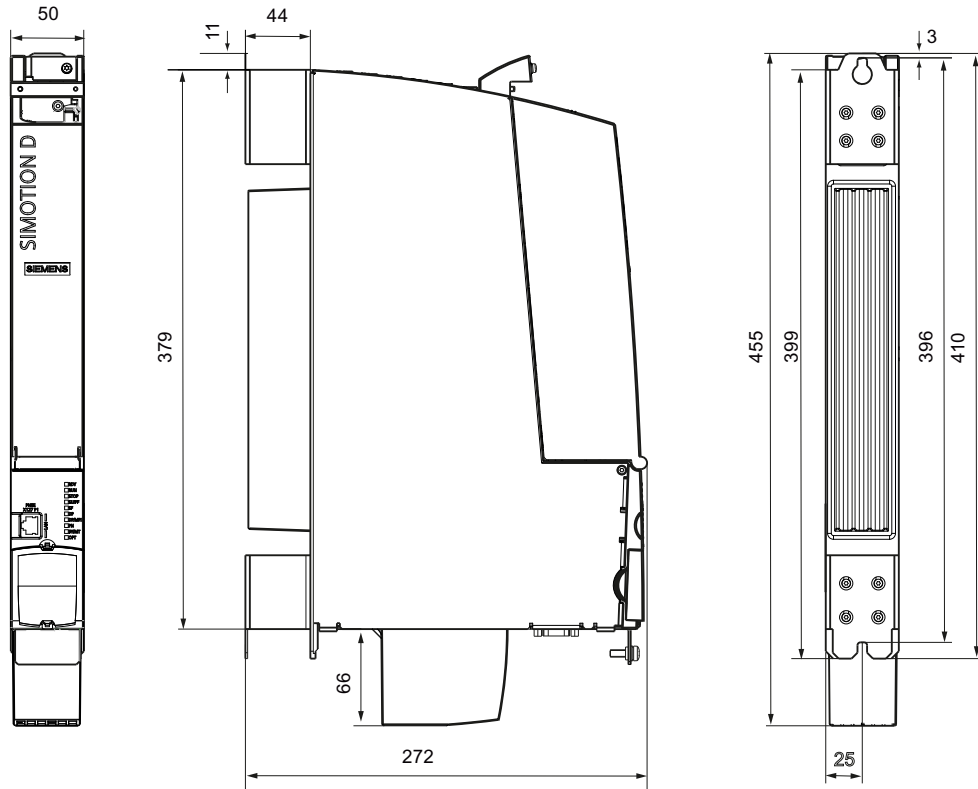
D445-2 DP/PN and D455-2 DP/PN dimension drawing
